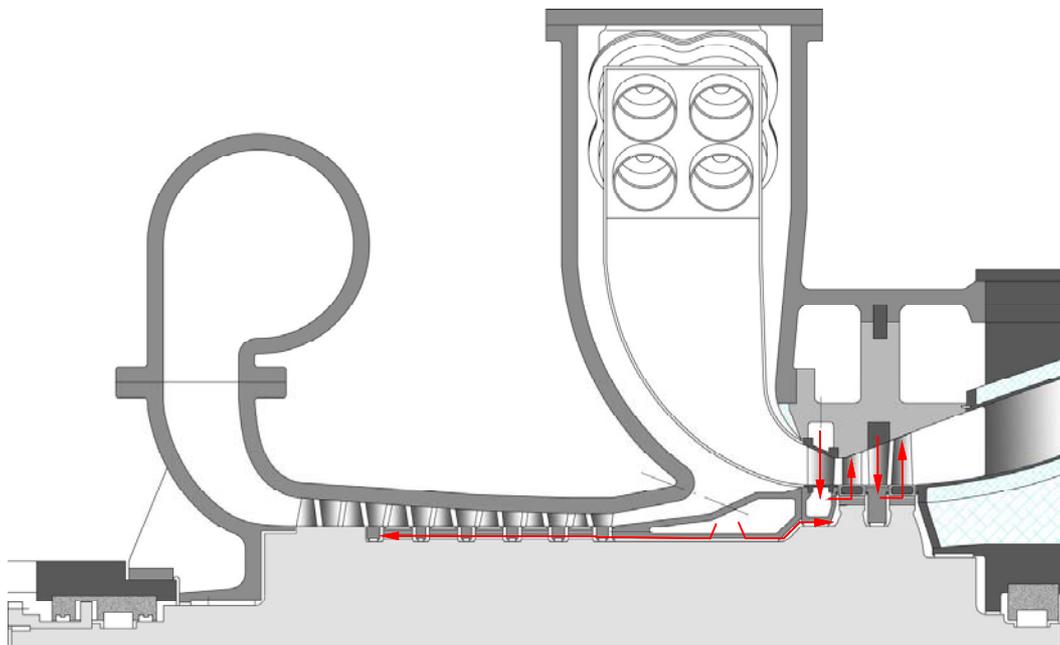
Design of C2 drum rotor with cooling steam flow arrangement, combustor and HTTC
